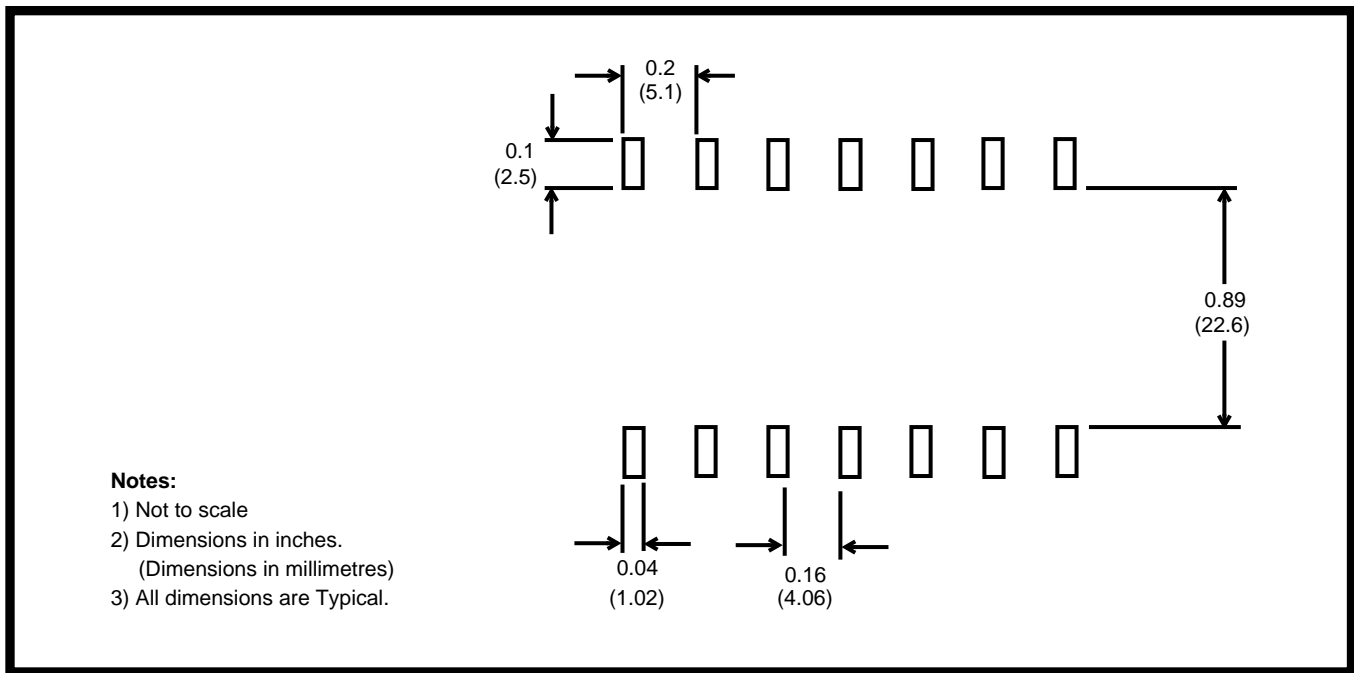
Recommended Footprint for 26 Pin Surface Mount Hybrid
